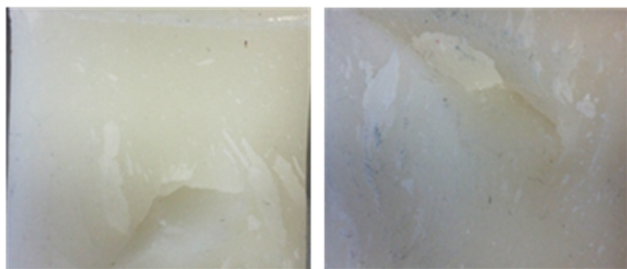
Fracture surfaces of paraffin wax solid grain samples manufactured with the die casting method.
